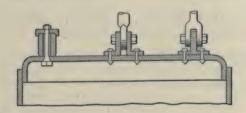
METHODS OF BRACING A CROWN SHEET.
